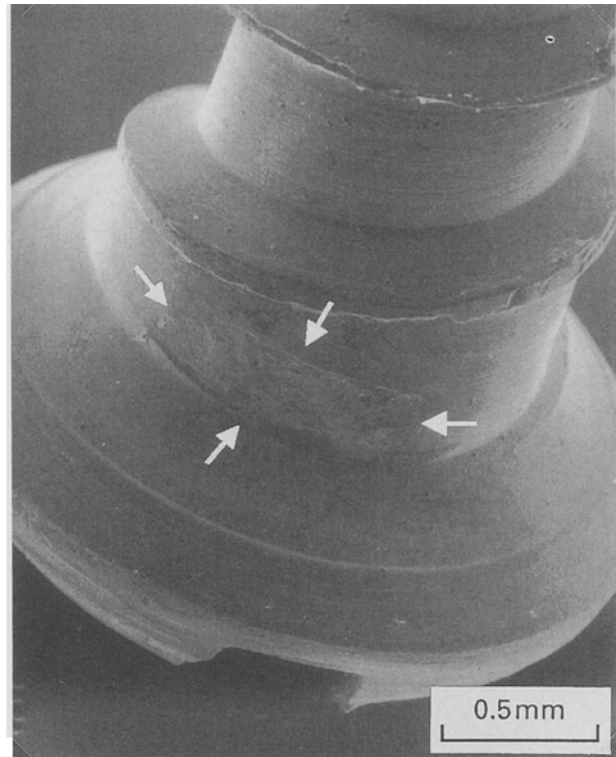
Corrosion defect of a stainless steel screw (arrows), where an interface between screw core and plate exists.
